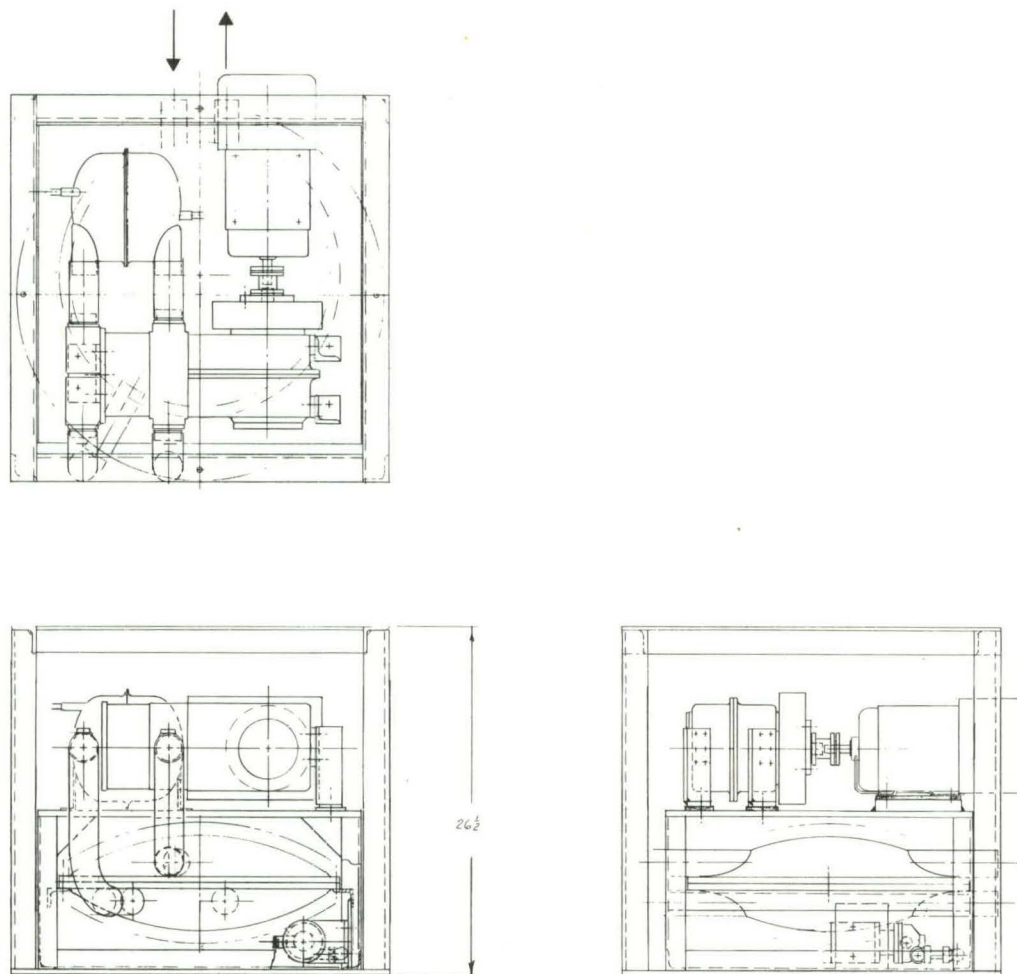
Detailed Drawing of the Compressor/Expander System
